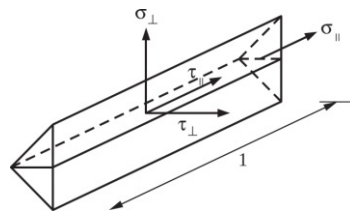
Stresses on the throat section of a fillet weld(unit length) [3, p.138]
